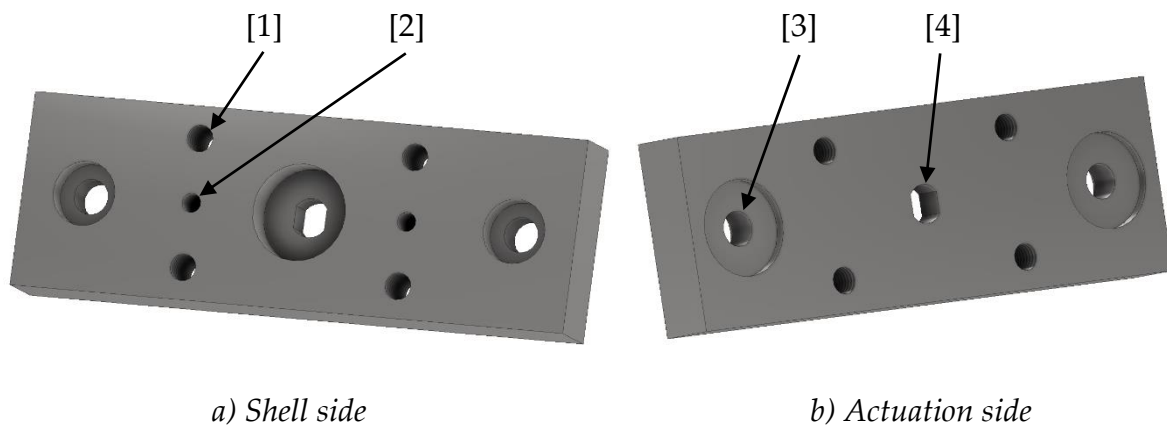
Frontal and rear view of the connecting plate. [1] threaded holes for the four bolts sized in chapter 5.2.2, [2] calibrated holes for two centering pins, [3] counterbore holes for the centering and the connection of the two cylindrical guides, [4] connection hole for the actuator stem.
